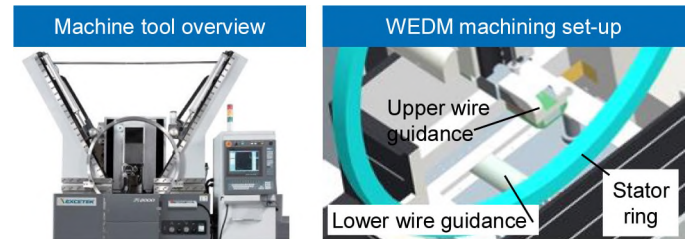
Machine equipment for flexible machining of blading cut-outs in stator rings, (courtesy of Exetec/Ona Electroerosion).
